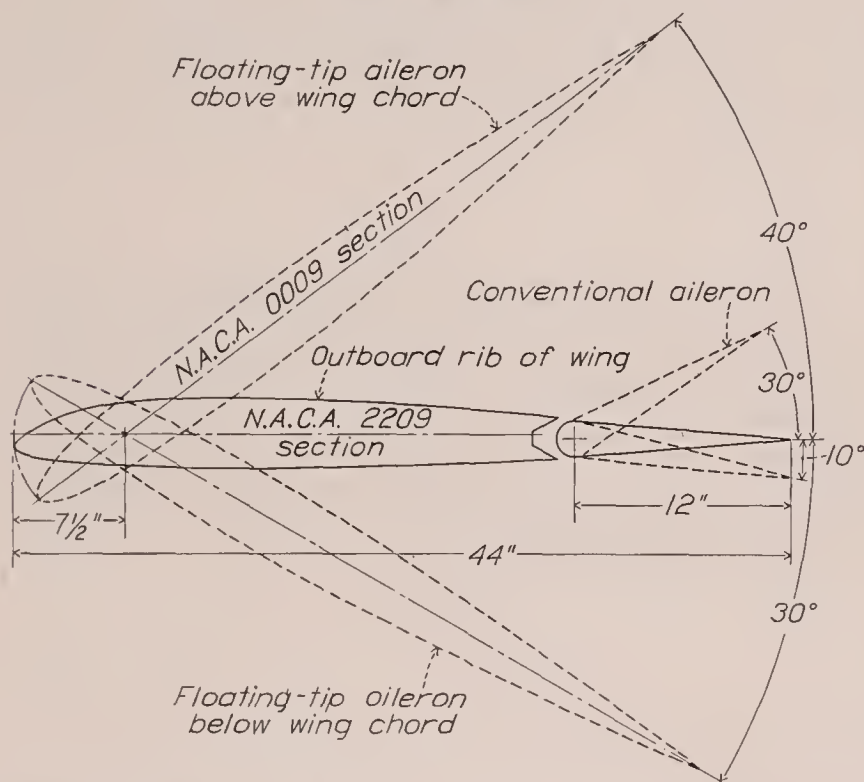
Section through tapered wing at outboard end of conventional aileron.
